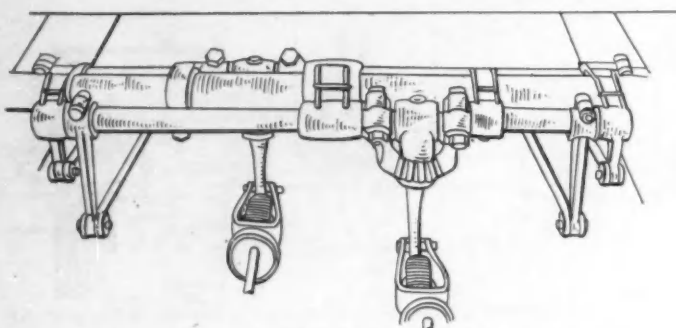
A TRUCK-BRAKE CONTROL EQUIPPED WITH A DIFFERENTIAL EQUALIZER
